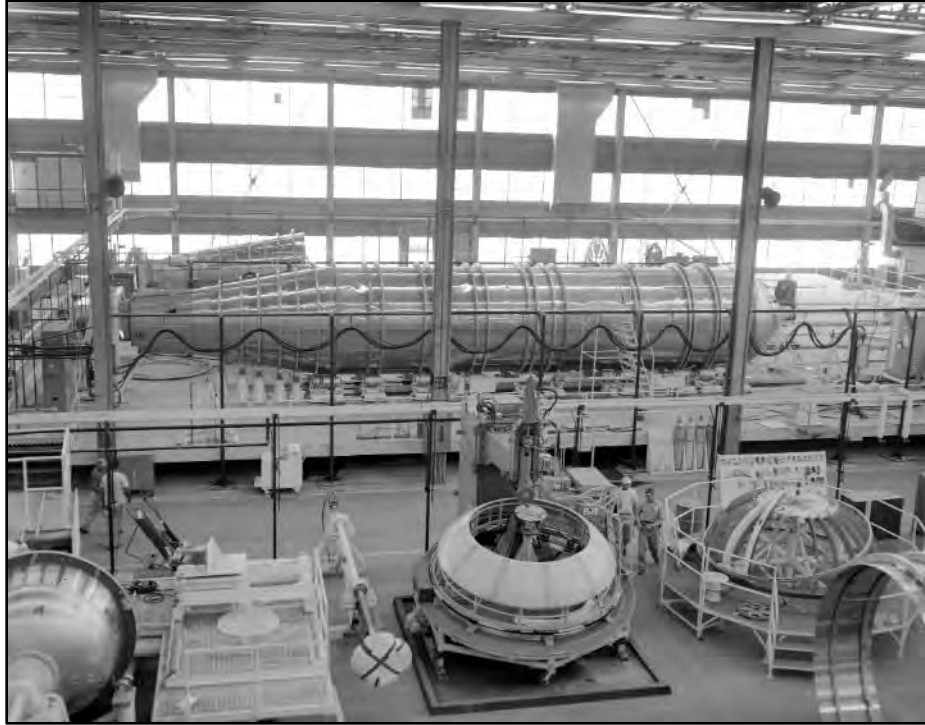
First Tank Section Production from Plant 2, Atlas 106D (October 18, 1960)
